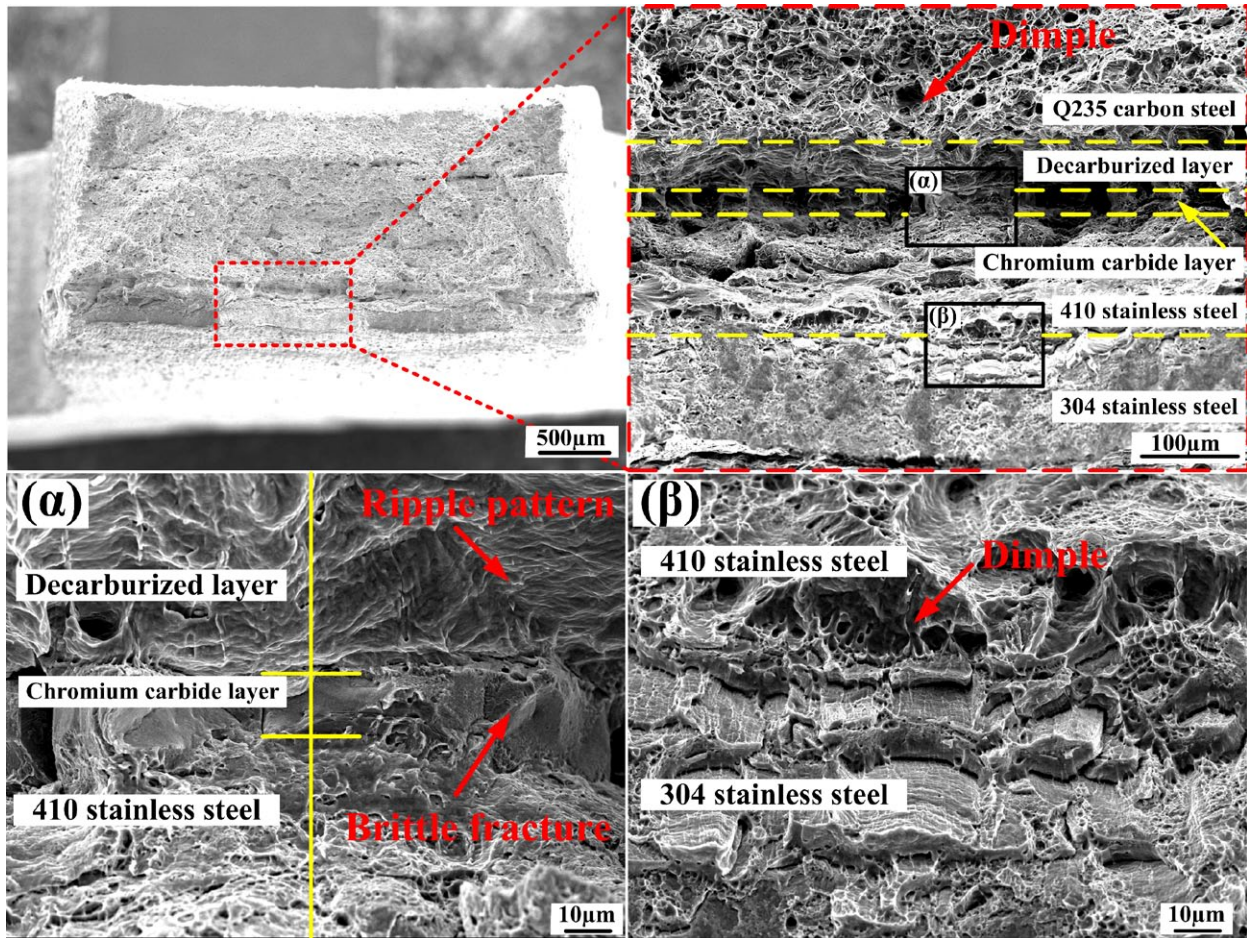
The macroscopic and microscopic tensile fracture morphology of the hot-rolled composite plate
